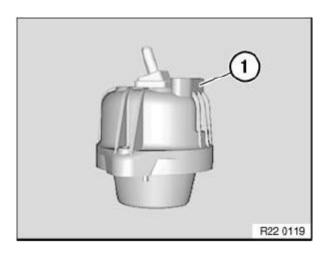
Identifying Rubber Section Of Engine Mount Courtesy of BMW OF NORTH AMERICA, INC.
